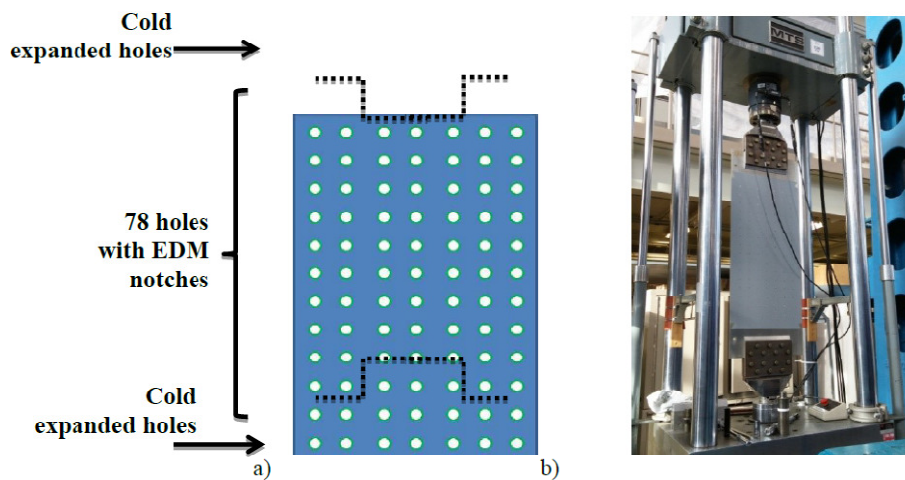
Test panels: a) containing 78 holes 0.125 " in diameter with machined 0.015 " EDM notches in one side to facilitate crack nucleation and propagation and b) test panel mounted in a MTS uniaxial load frame for fatigue testing.
